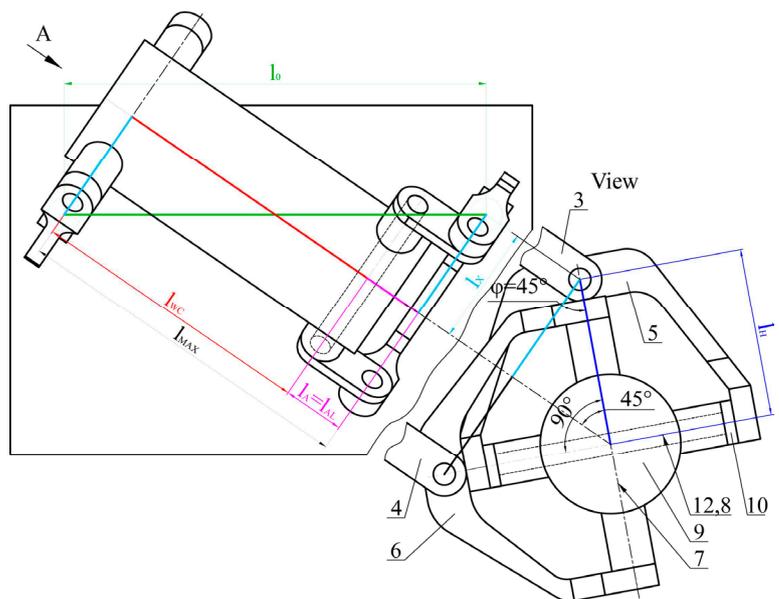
Projection of the structure onto a plane parallel to the ends of the container: 3 – driving shaft; 4 – driven shaft; 5 – driving holder; 6 – driven holder; 7 – geometric axis of the container attachment; 8 – geometric axis of the auxiliary link attachment; 9 – working container; 10 – auxiliary link; 12 – geometric axis of the container attachment
